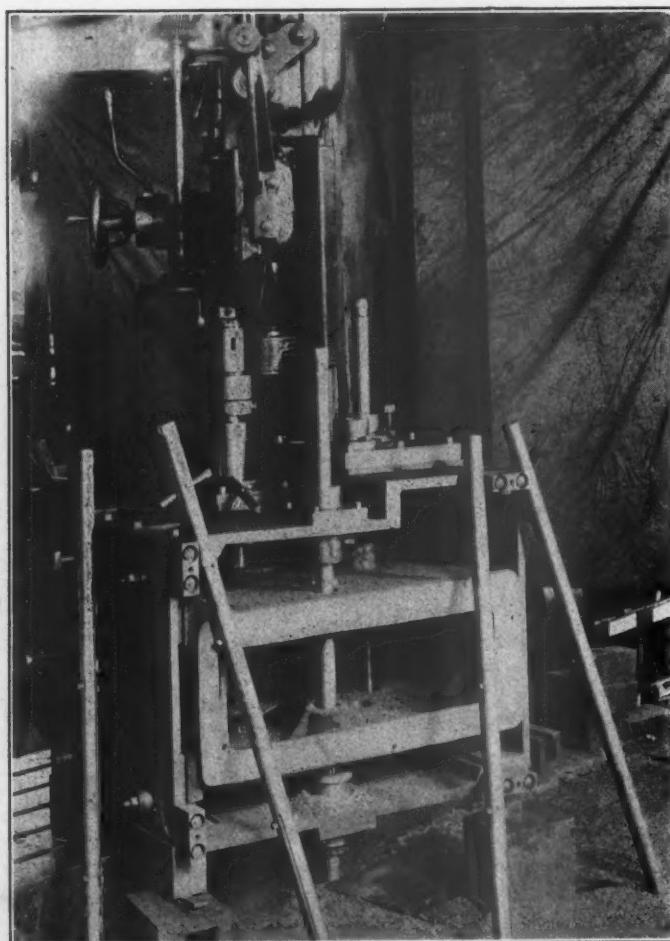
BORING JIG FOR SHAPER COLUMNS.
